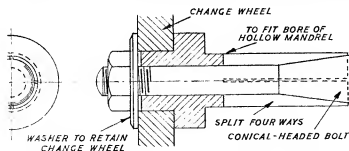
Expanding plug mandrel to carry change wheels on tail end of hollow mandrel
